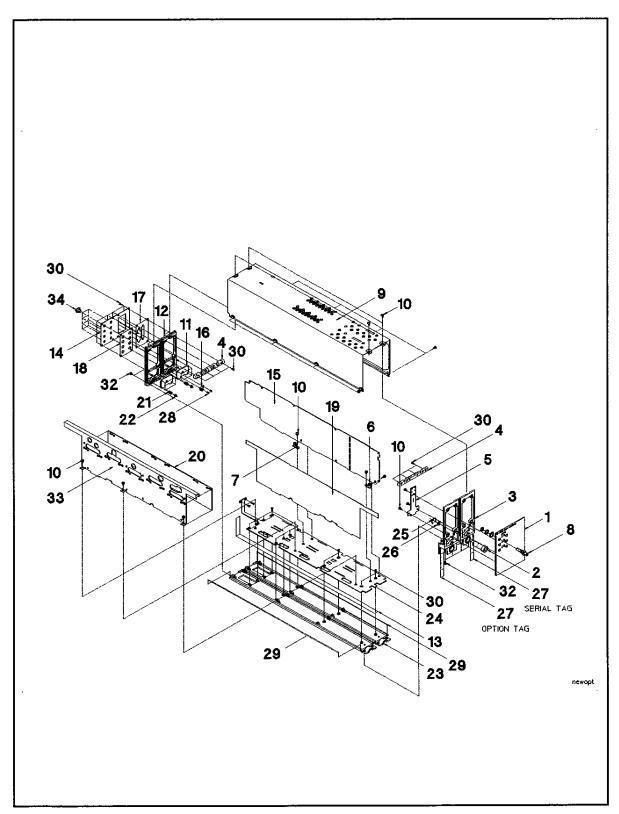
HP 70612A/C and 70613A/C Option 011
